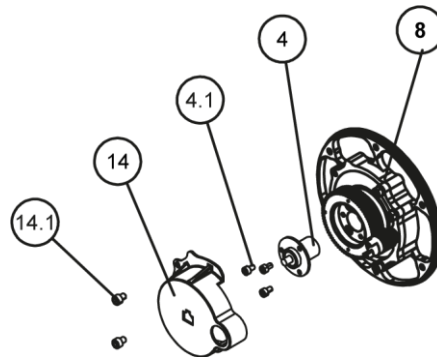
Exploded view of passive flange tilt with gear cover tilt and slip ring tilt
